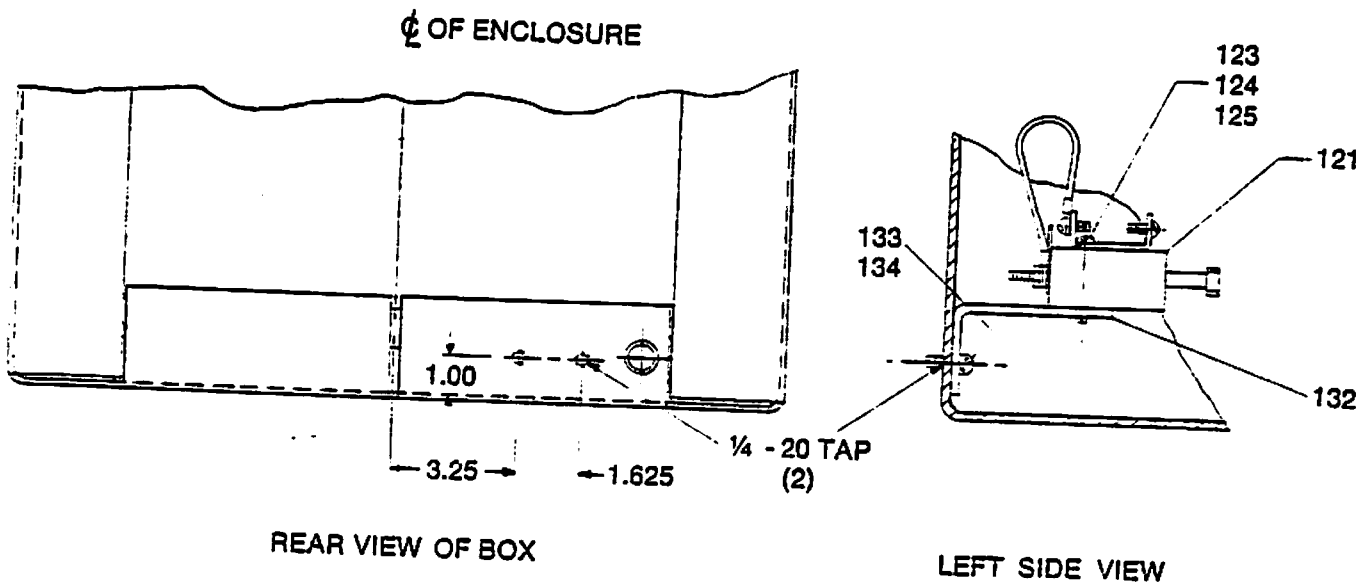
Mounting of 4th-wire neutral sensor disconnect block in AKD type OEM box.
